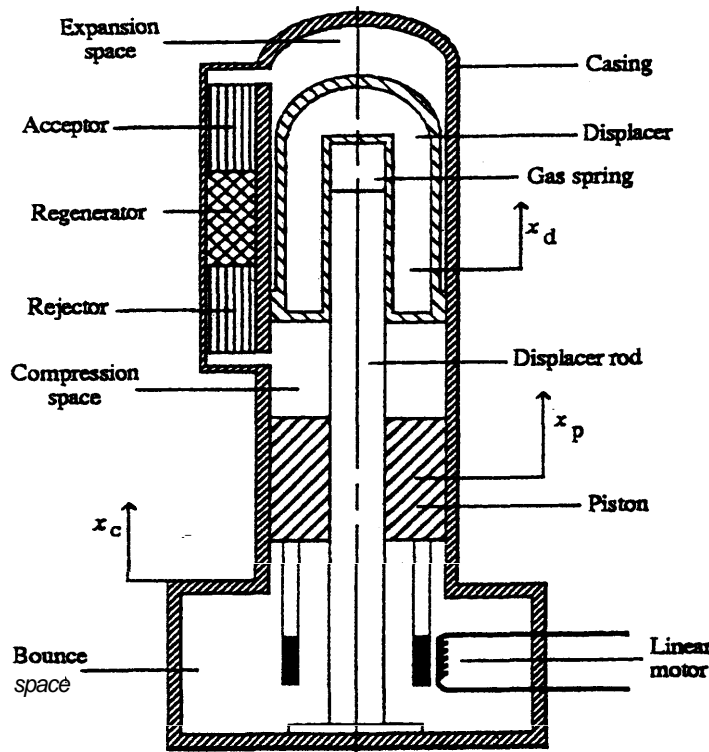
General arrangement of a be-piston Stirling cooler driven by a linear motor
